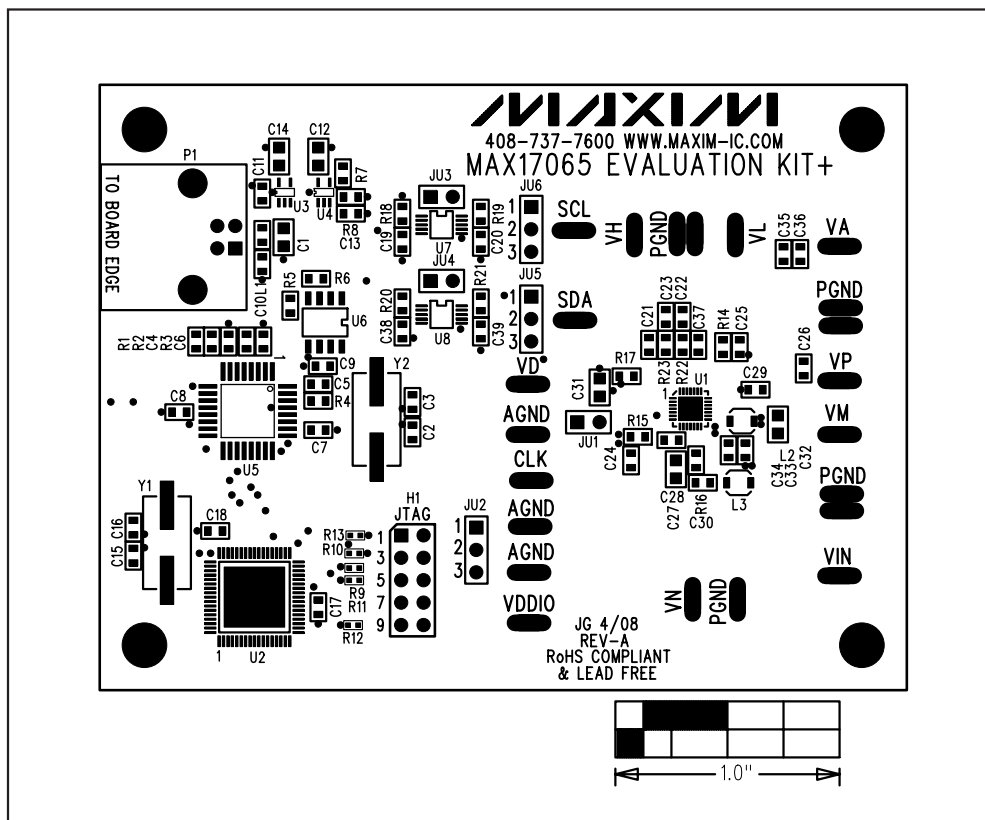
MAX17065 EV Kit Component Placement Guide—Component Side
